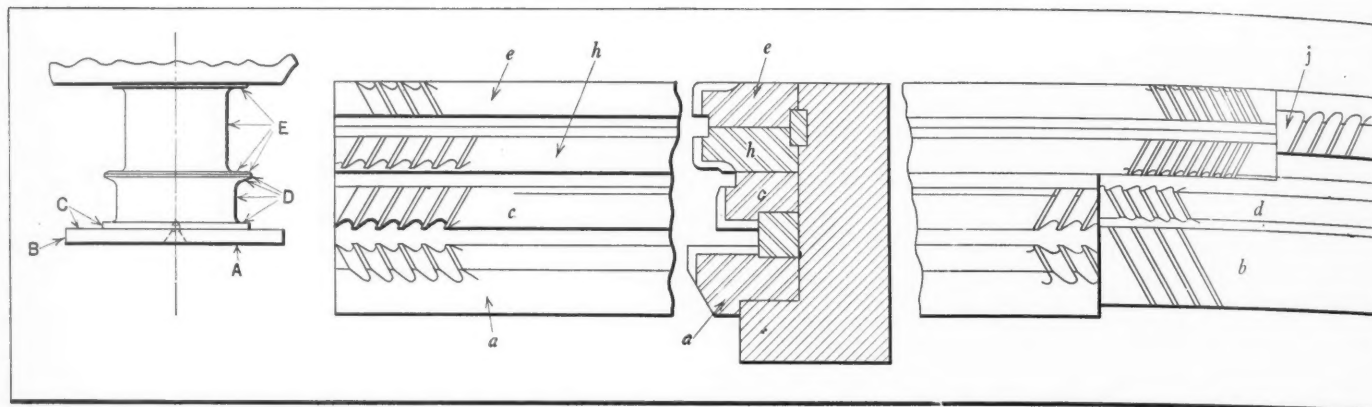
The Broaching of Crankshaft Main Bearings Represents a Radical Departure in Broaching Practice.
